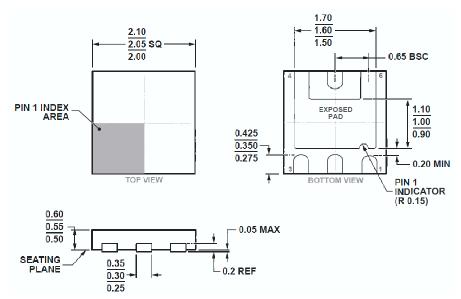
6-Lead Lead Frame Chip Scale Package [LFCSP_UD] 2 mm x 2 mm Body, Ultra Thin, Dual Lead (CP-6-7) Dimensions shown in millimeters.
